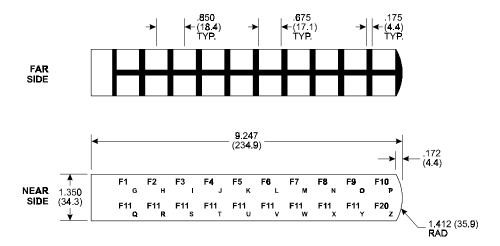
3510KP/3512KP Insert with Dimensions (F1 - F20)
